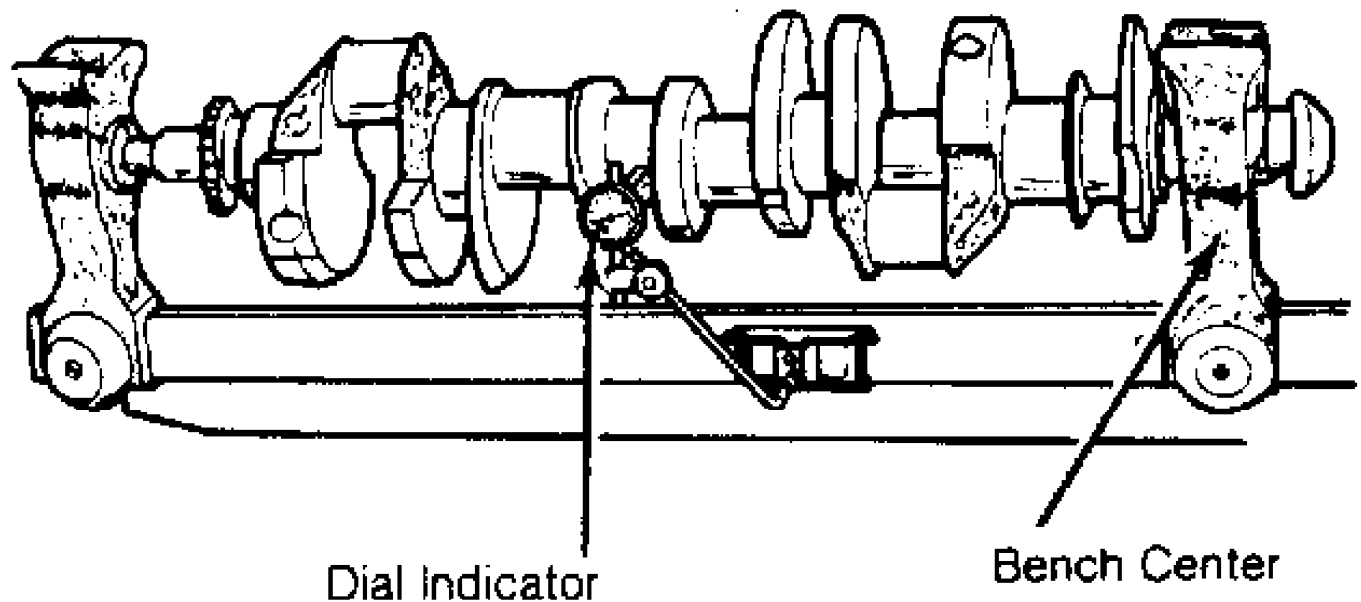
Measuring Crankshaft Main Bearing Journal Runout - Typical
